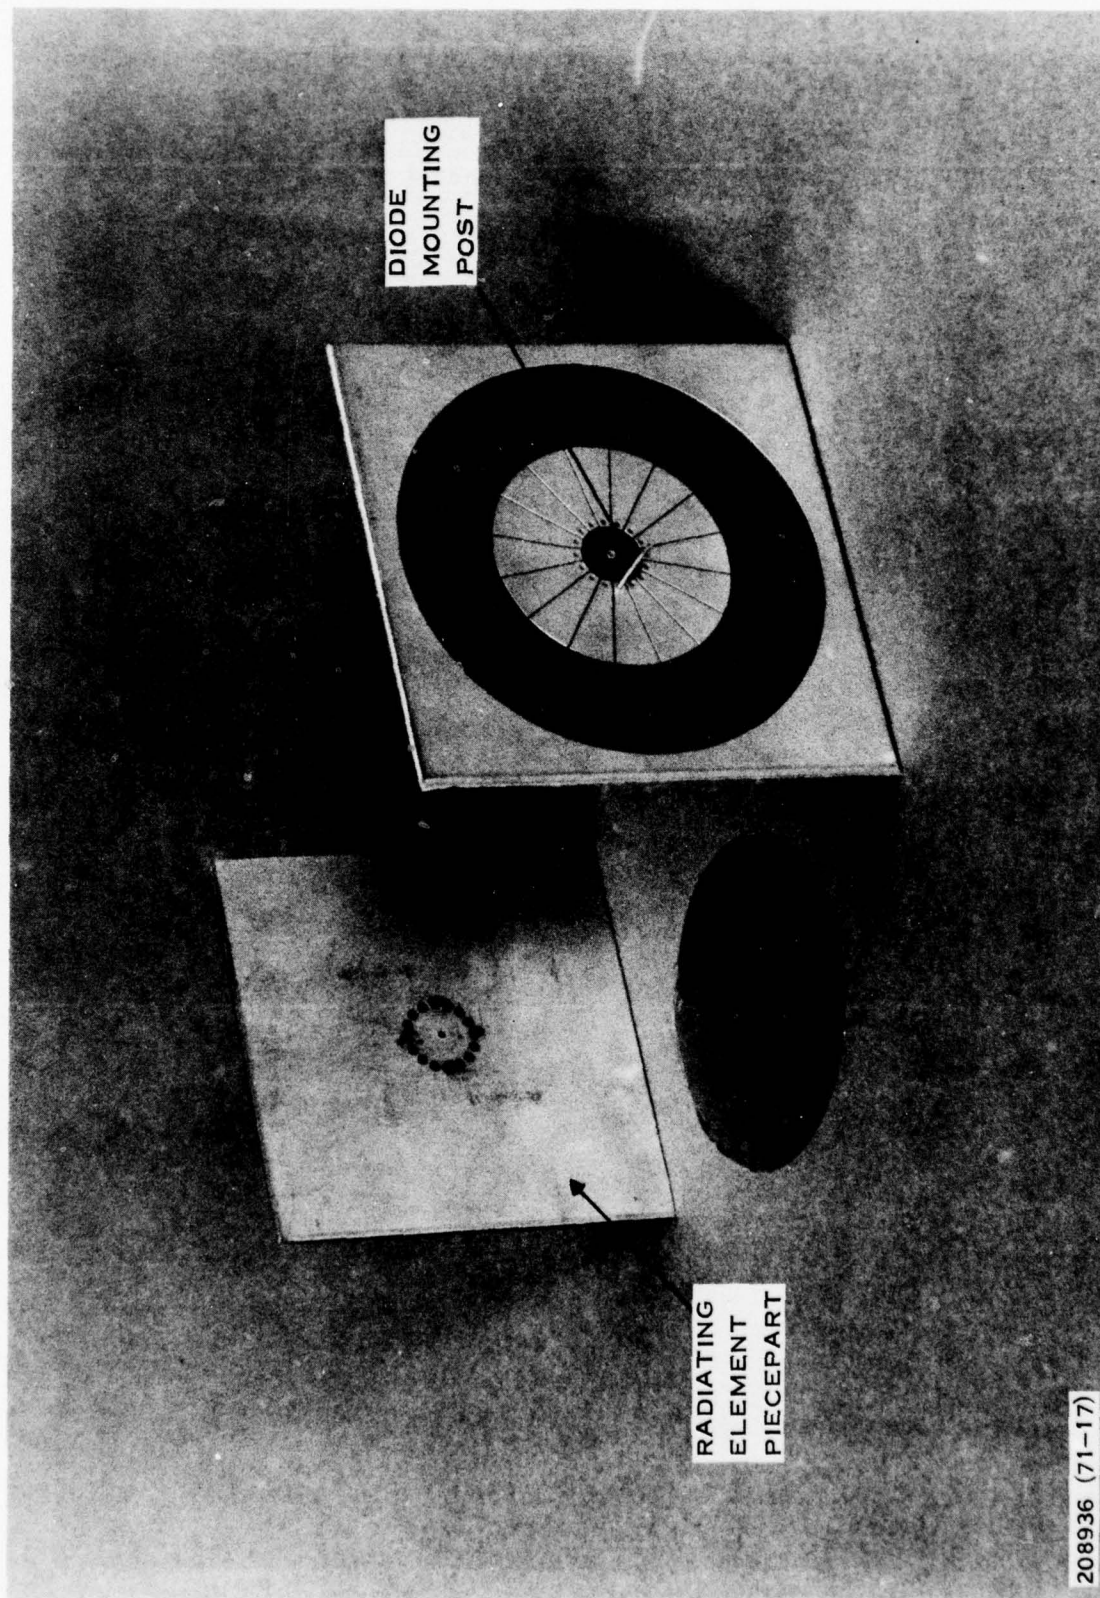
Reflectarray Microstrip Element Exploded View—Back Side
